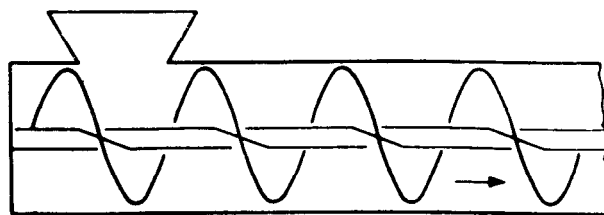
FULL BLADED TYPE, SCREW CONVEYOR
